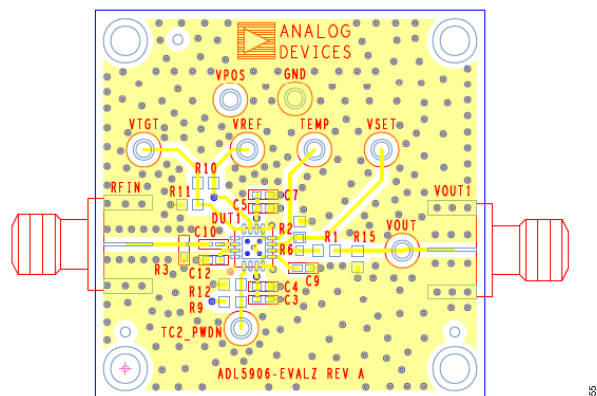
ADL5906 Evaluation Board Layout, Top Side
